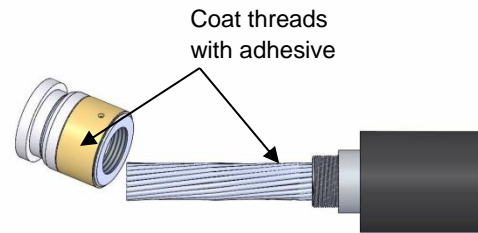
Apply adhesive to the threaded shoulder and the internal threads of the collar.
